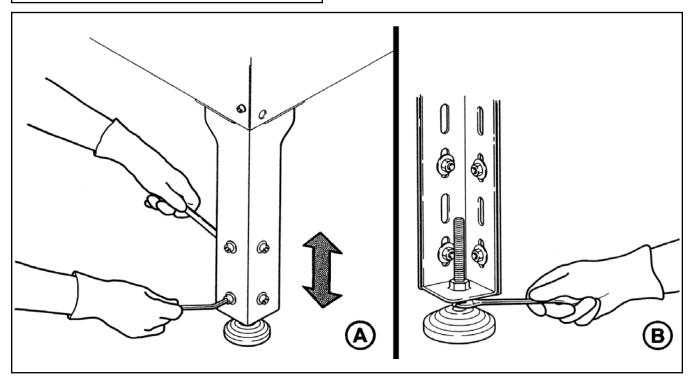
Machine Bed Height Adjustment and Lower Tape Drum Bracket Position
